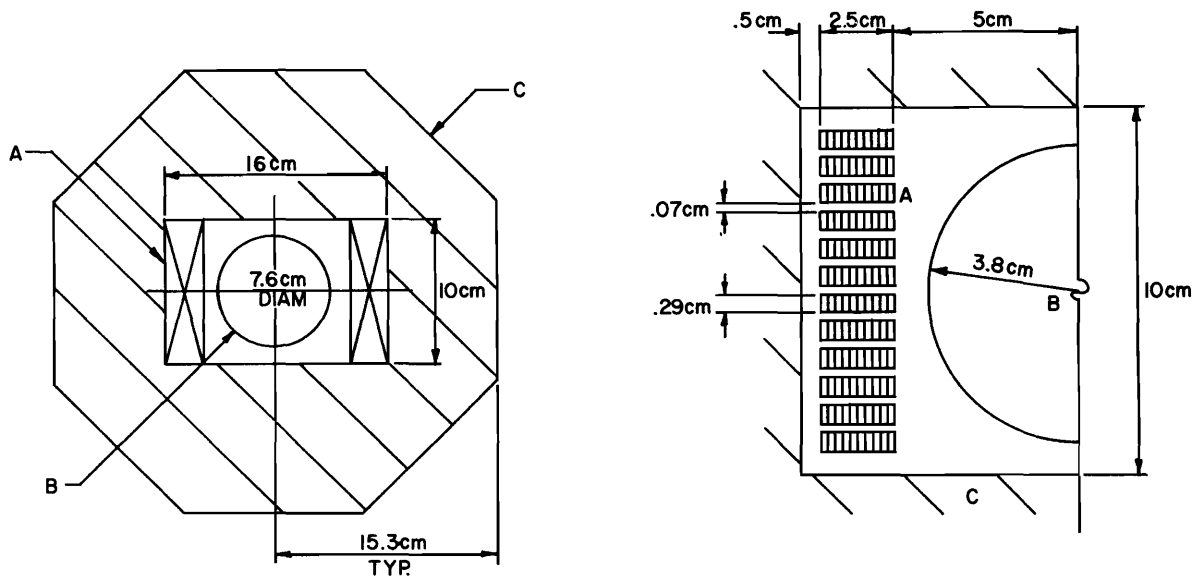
, A&B. Magnet cross section. Legend: A = magnet winding; B = beam tube; C = iron.
